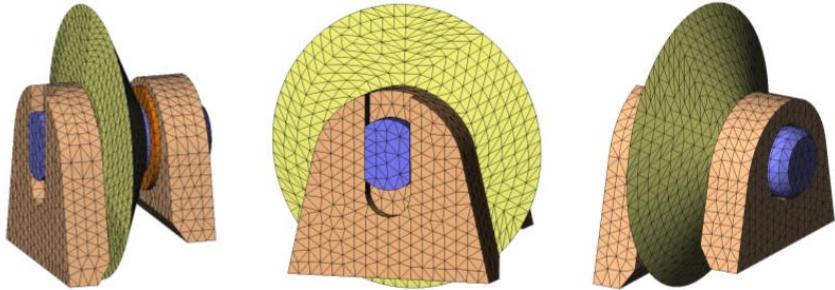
Finite element model of a double-seats knot fastening disk tool
